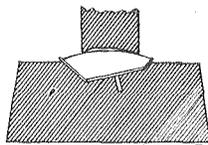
Adapting the Backing to Facing Against Cork with Light Hammer Blows
